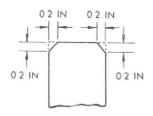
Bending of turbine blade tip corners, indicating maximum dimension of bend for acceptance at 50 hour inspections; not more than one-third of the total number of blades may be affected.
